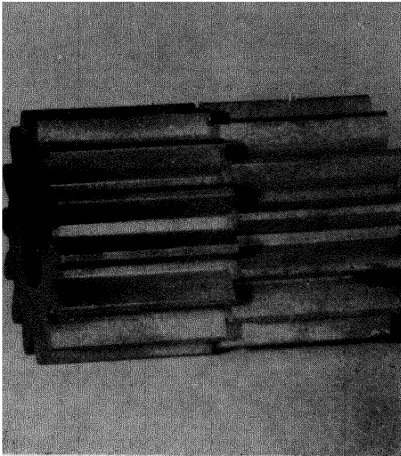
Offset spur gear assembly from cemented steel. The two gears were individually molded and clamped together in a fixture before being sintered and radially infiltrated with copper alloy. During infiltration, gears were brazed into one unit. Such a gear unit cannot be produced by conventional powder metallurgy processes, since the offset teeth prevent ejection from the mold.
